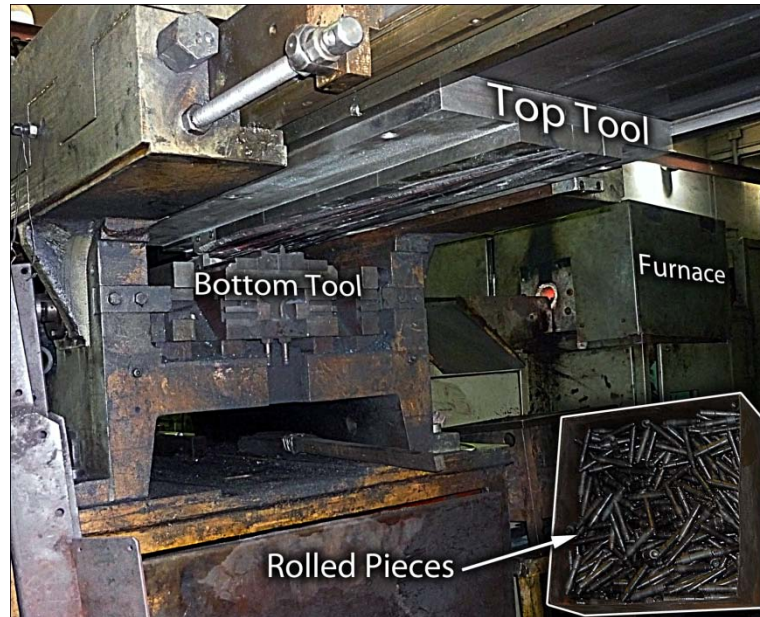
The CWR machine at the Physical Technical Institute of NAS (Belarus) and the rolled products.
